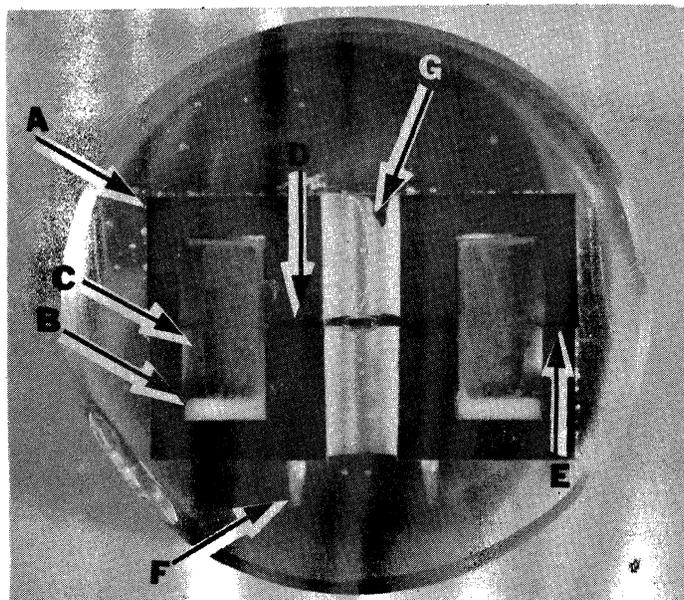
Mid-Plane Section through a Typical AF Pot Core Transformer/ Inductor Assembly Showing:
